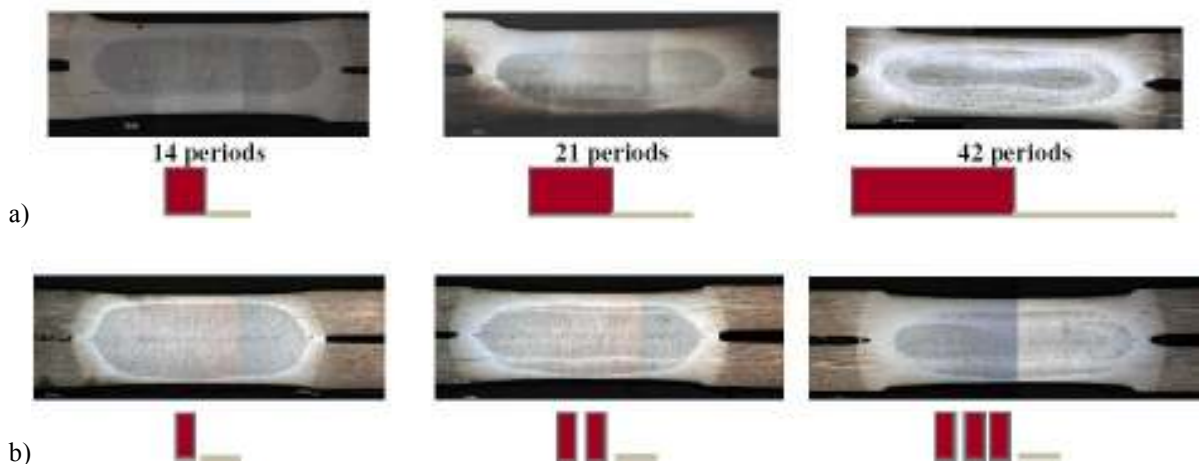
Optical micrograph of the cross section of the spot weld in case of a) continuous welding pattern
